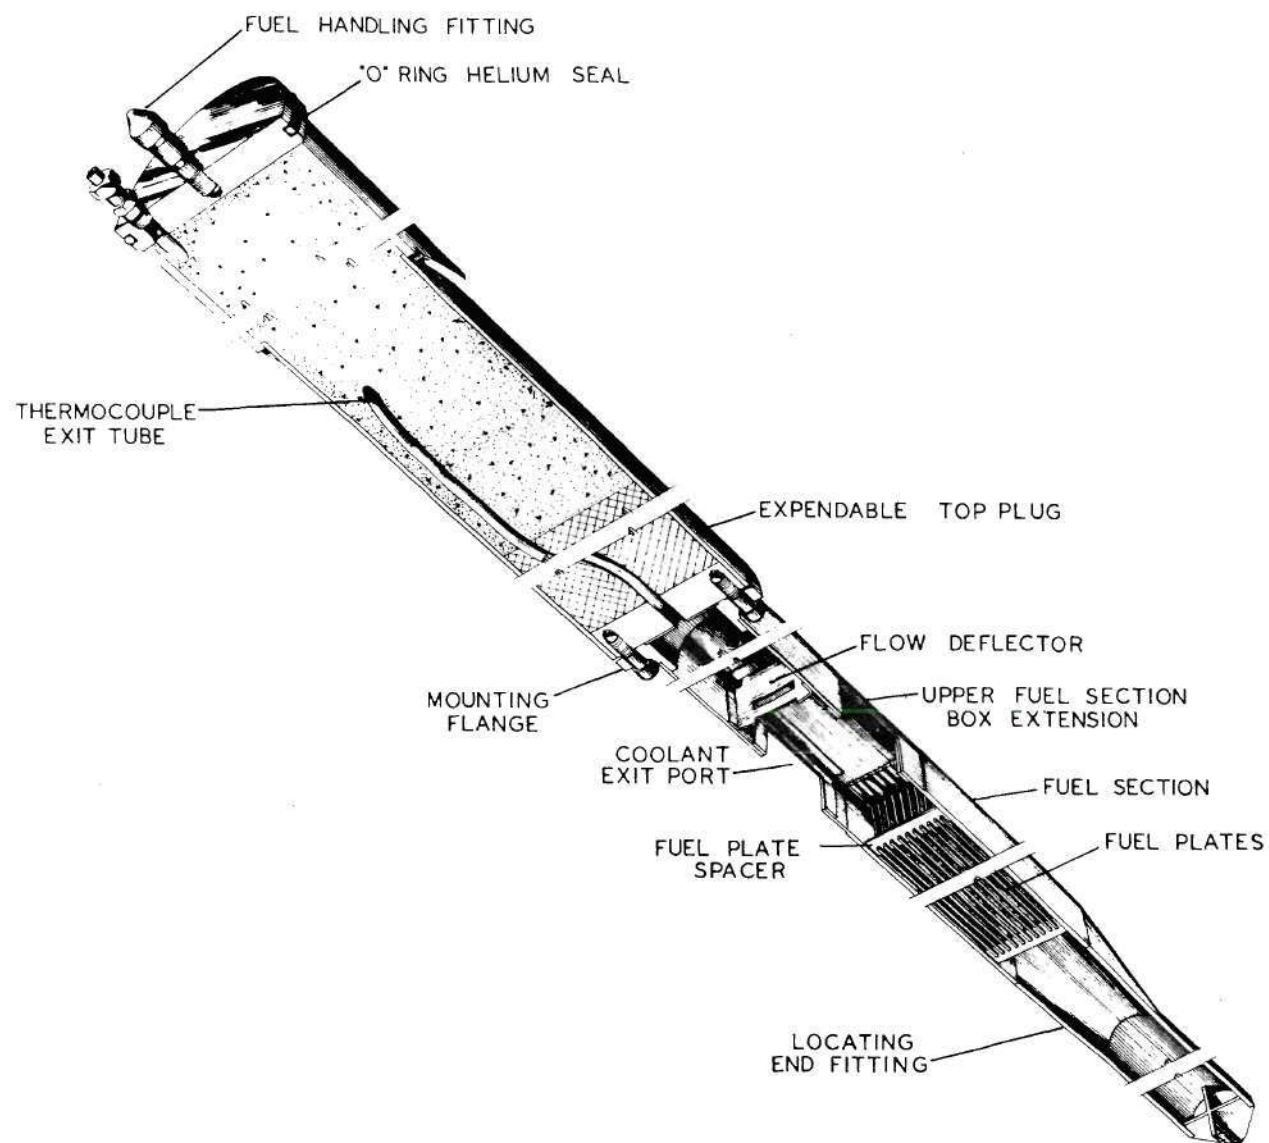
Perspective of GTRR Fuel Assembly Mark-I and Lower Shield Plug
